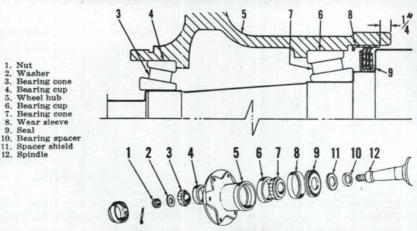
Views of front wheel hub assembly used on dual front wheel tricycle models. Wide front axle models are similar except spacer (10) and shield (11) are not used.
